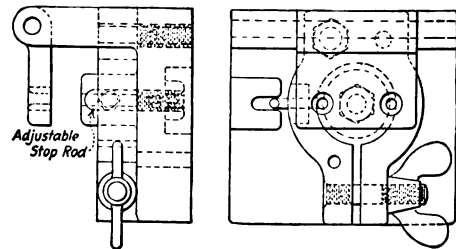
DRILL JIG FOR TWO HOLES IN TOP OF ADAPTER. THIS JIG IS ALSO USED ON FACING TOP
